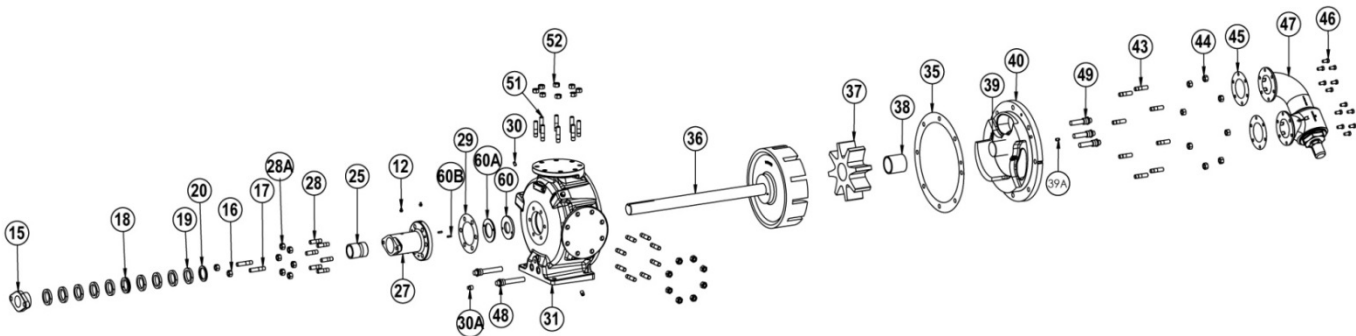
EXPLODED VIEW MODEL Q32/Q32E, M32/M32E AND N32/N32E PUMP
